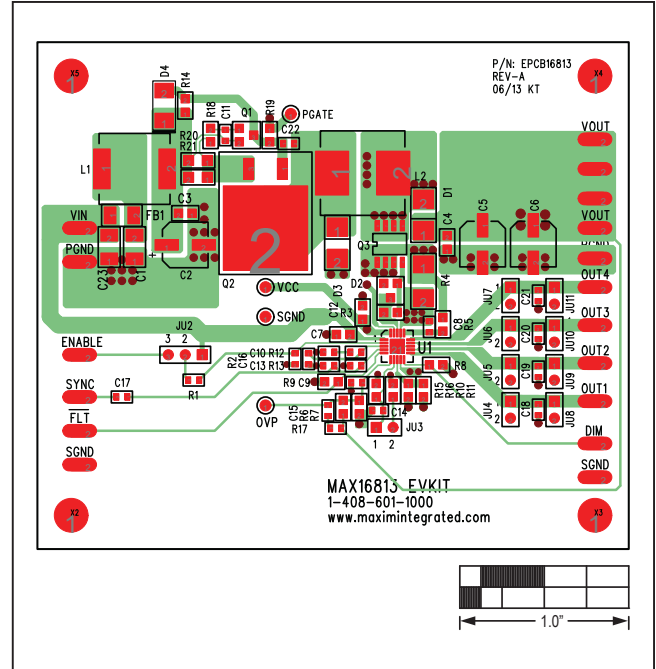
MAX16813 EV Kit PCB Layout—Component Side
